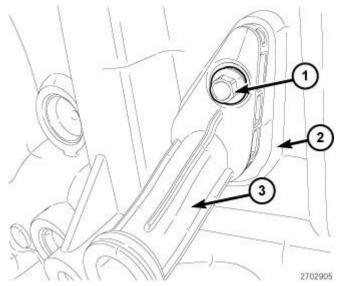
IDENTIFYING COOLANT TUBE, ENGINE BLOCK & BOLT Courtesy of CHRYSLER LLC
